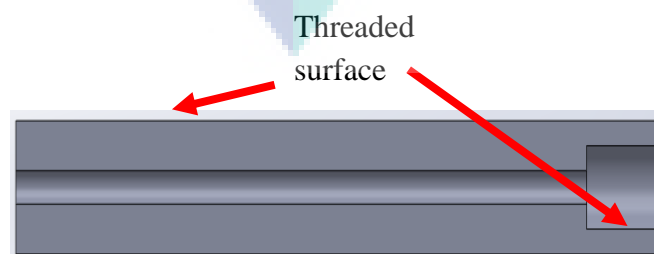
Modification diagram of engine head (cross sectional diagram)
